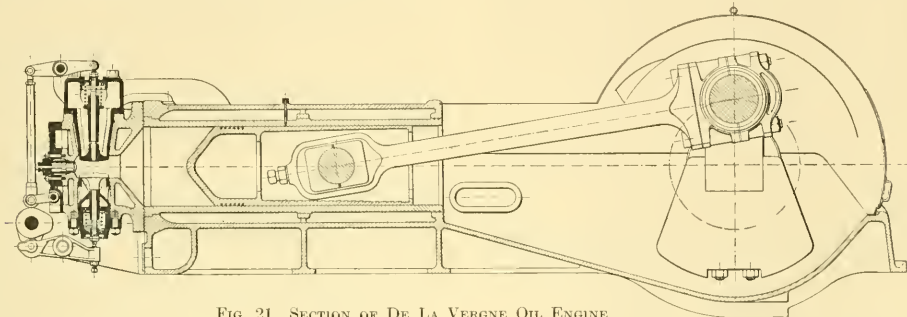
SECTION OF DE LA VERGNE OIL ENGINE
